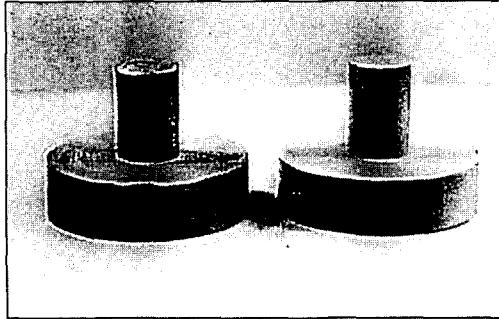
Appearance of the samples; the forging pressure of 490 MPa and the back pressure of 0 (left) and 49 MPa (right).
